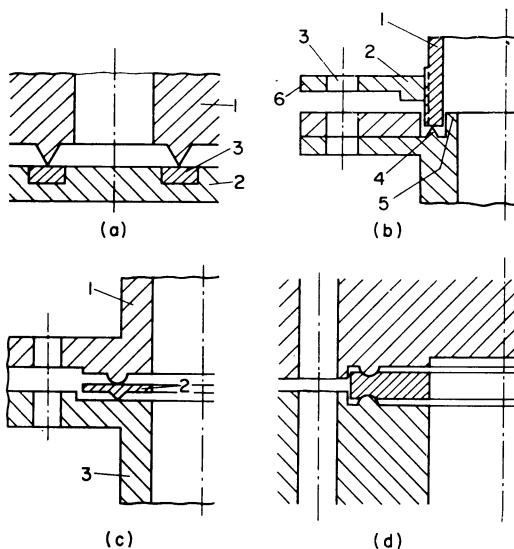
Single knife-edge seals: (a) indium seal (after Nicollian⁹²⁷); (b) axial seal. After Drowart³⁰⁵ (*Courtesy of The Institute of Physics and The Physical Society, London*); (c) knife-edge, coined gasket seal. After Mann⁸⁰⁰ (*Courtesy of The American Institute of Physics*); (d) Curvac seal (*Courtesy of Ultek^{1251a}*)
